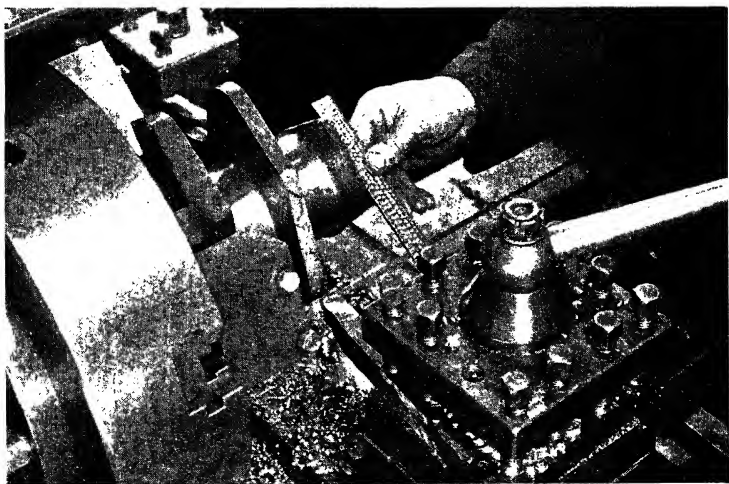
PRODUCTION OF LARGE MACHINED FITTING ON NO. 8 WARD LATHE (6).
